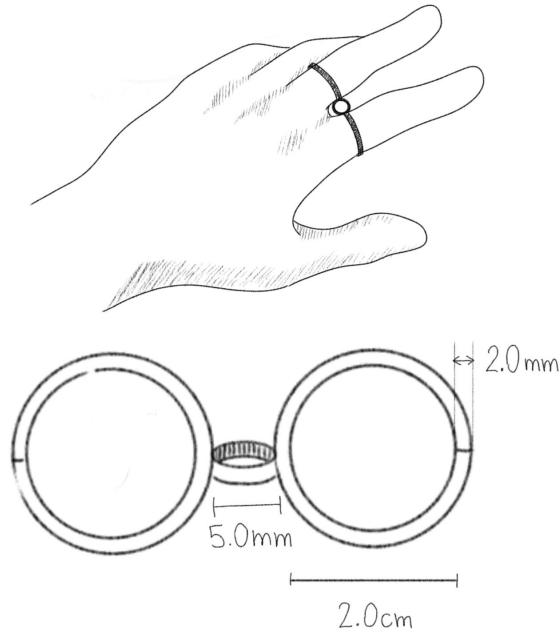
Drawing of Between Finger Stabilizer proposed design.
